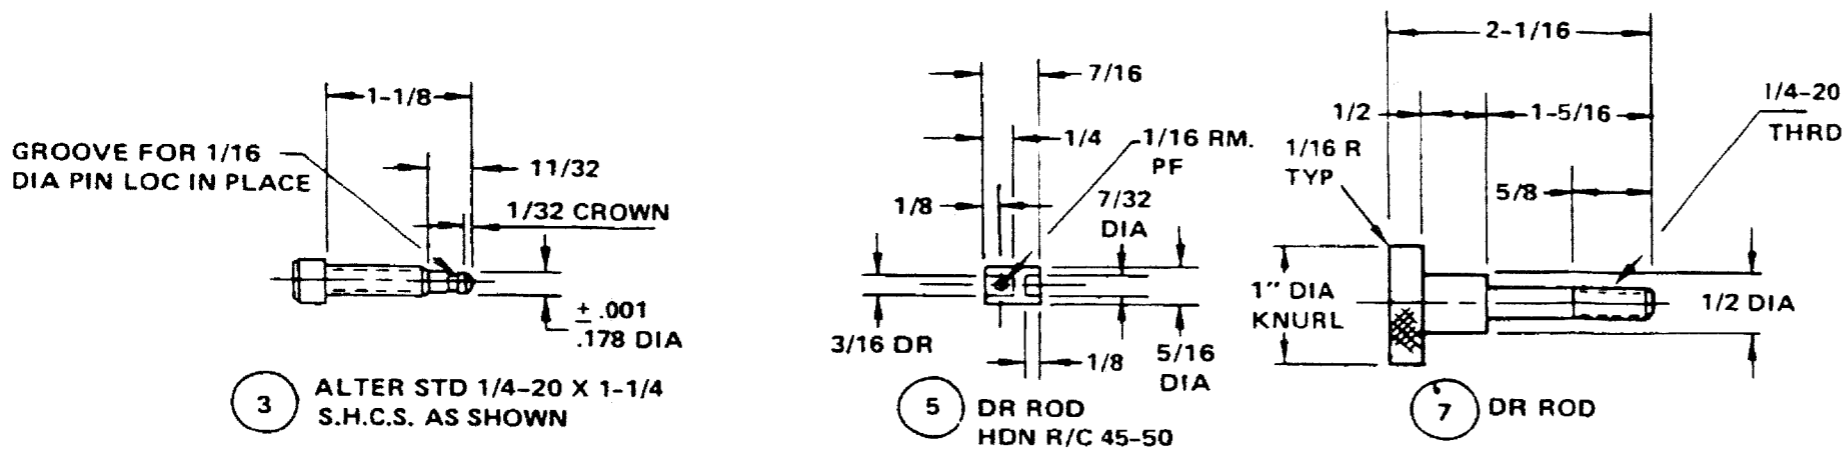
Carriage Motor Drill Jig Manufacturing Drawings (Sheet 1 of 2)
